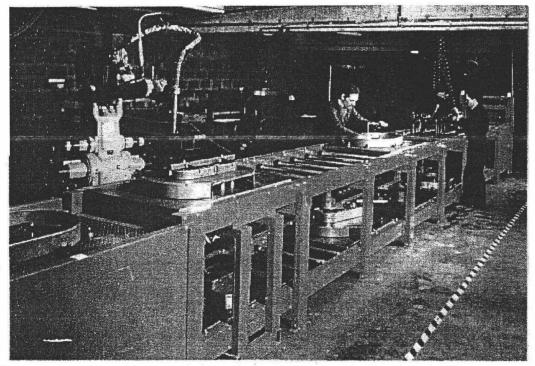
A Flexible Welding Transfer Line (Mckerrow, 1991)
